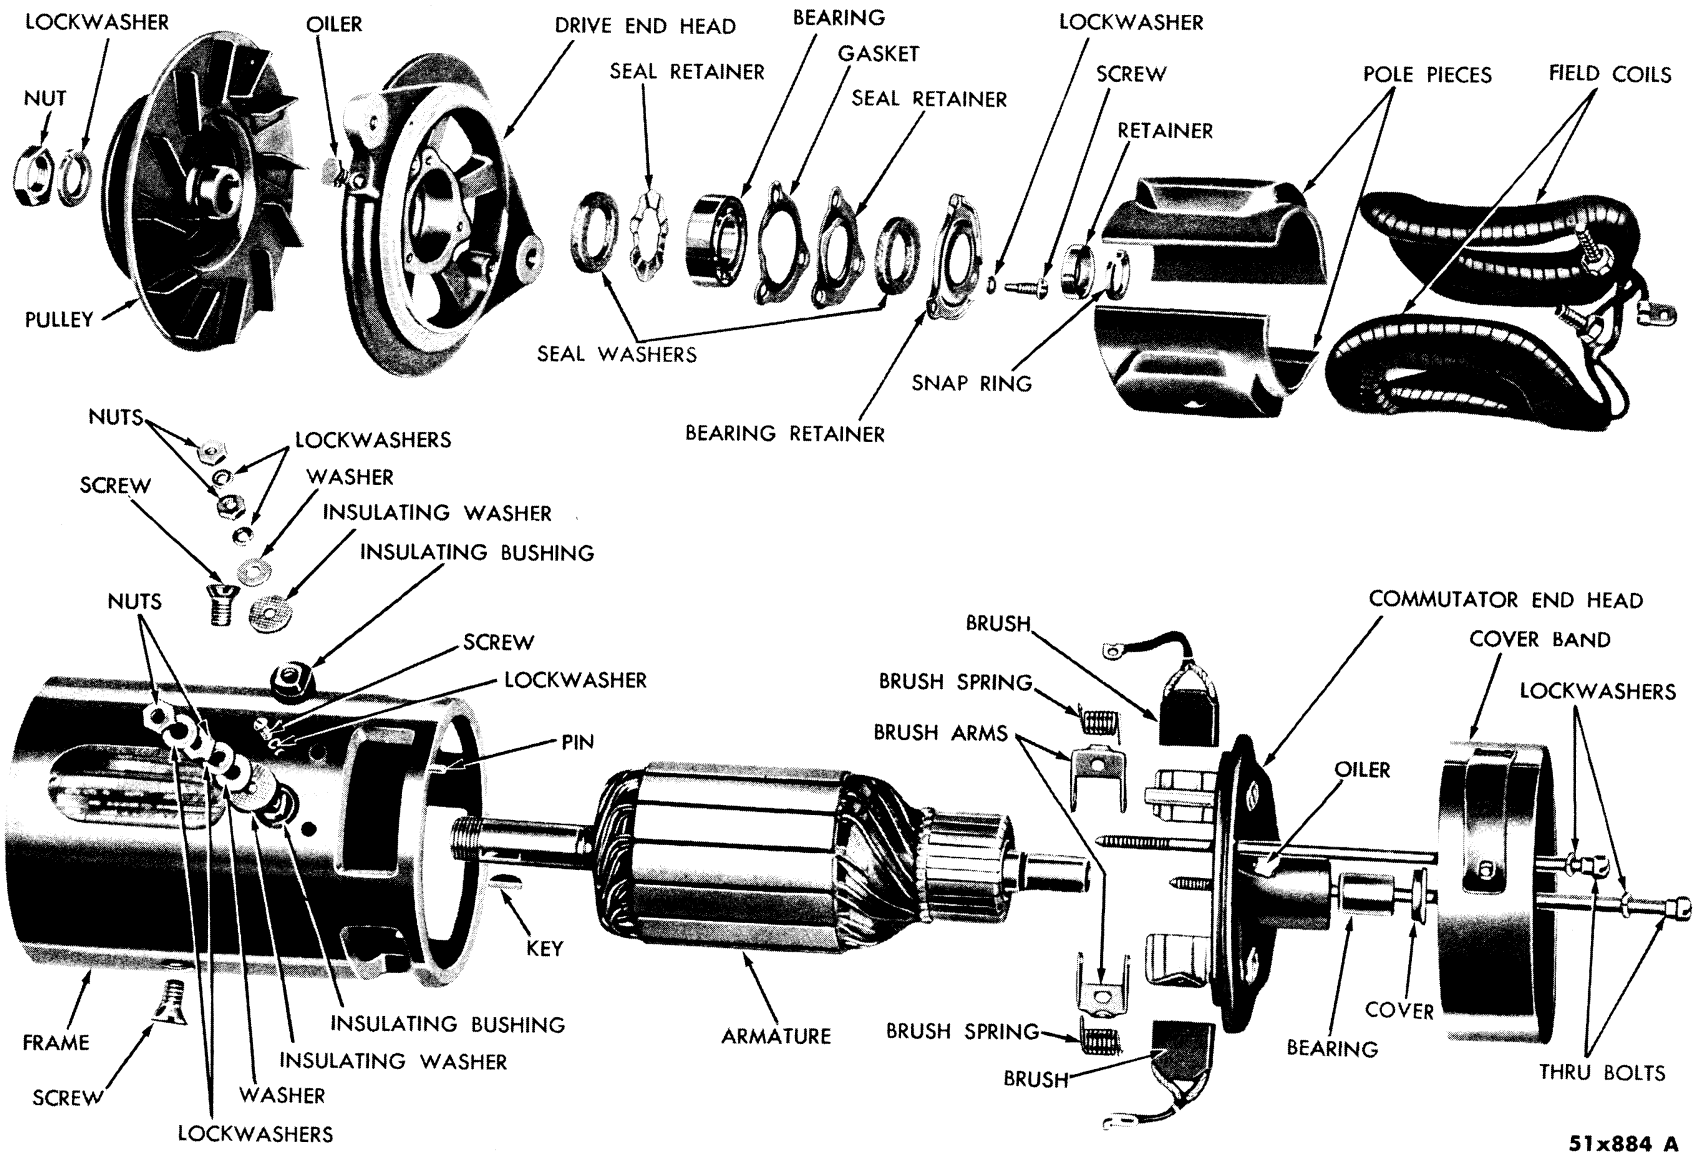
Generator Type GGW (C-67, C-68) (Without Power Steering)
